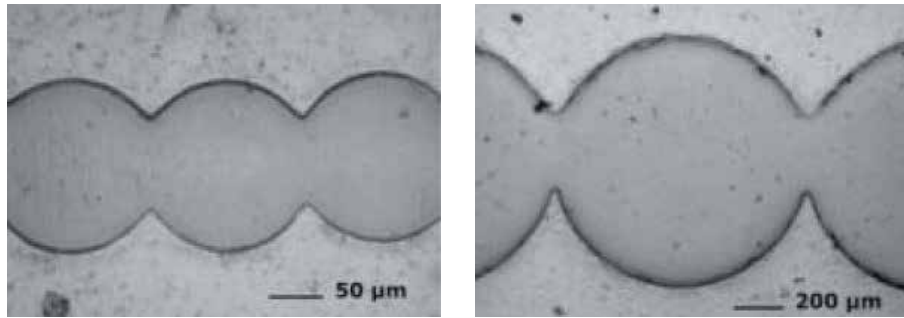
Cross section of laser welded glass cable bundle prior and after the elongation process
